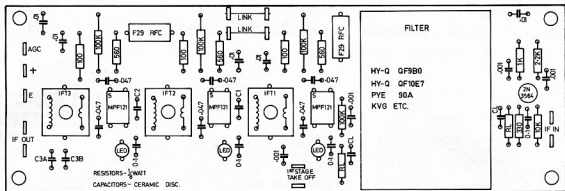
UNIT B - COMPONENT LAYOUT
